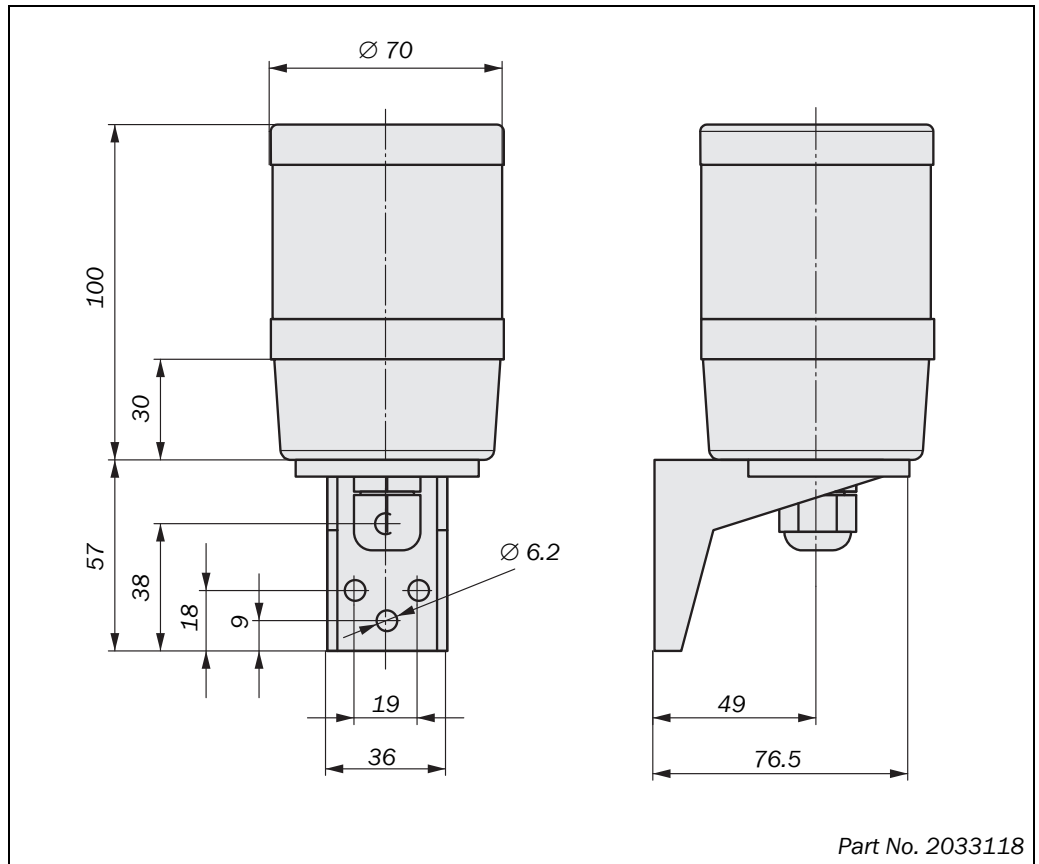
Dimensional drawing muting lamp, version with incandescent lamp (mm)
